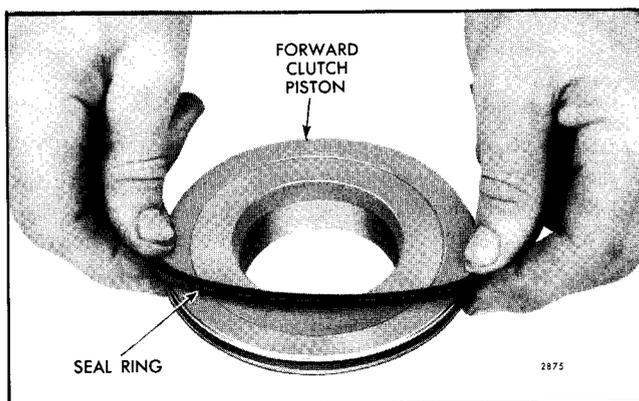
Installing Forward Clutch Piston Seal Ring on Piston
